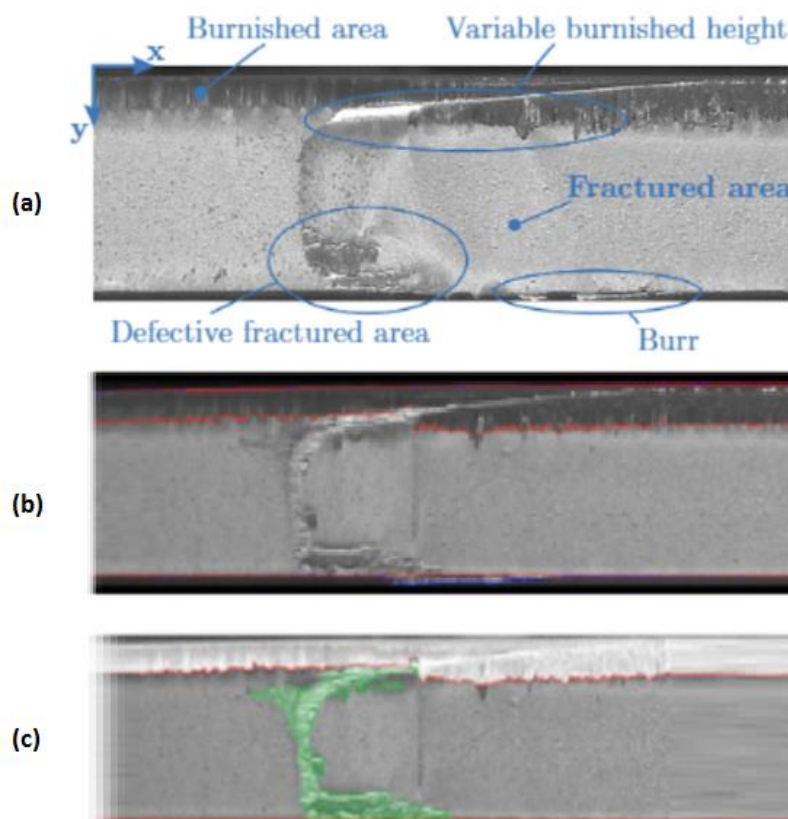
Inspection of trimmed steel (Zeiler et al. 2019)
